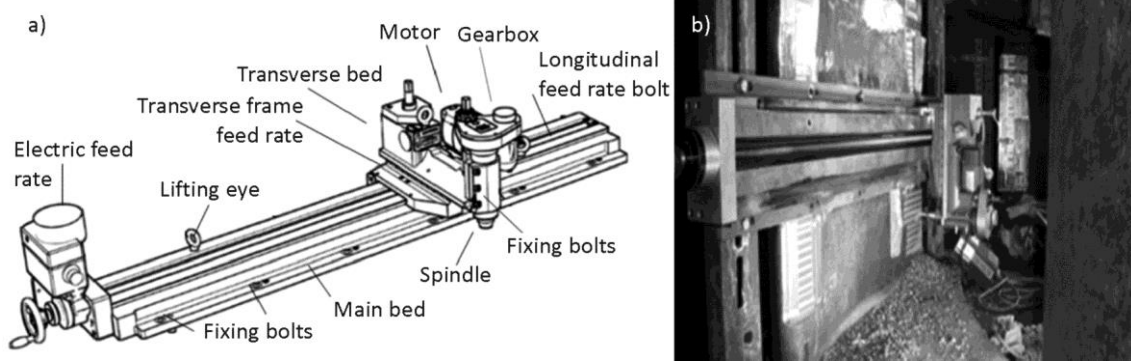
Portable milling machine: a) construction on the example of PM4200; b) milling a water turbine blade, an example without the disassembly of the machined object
